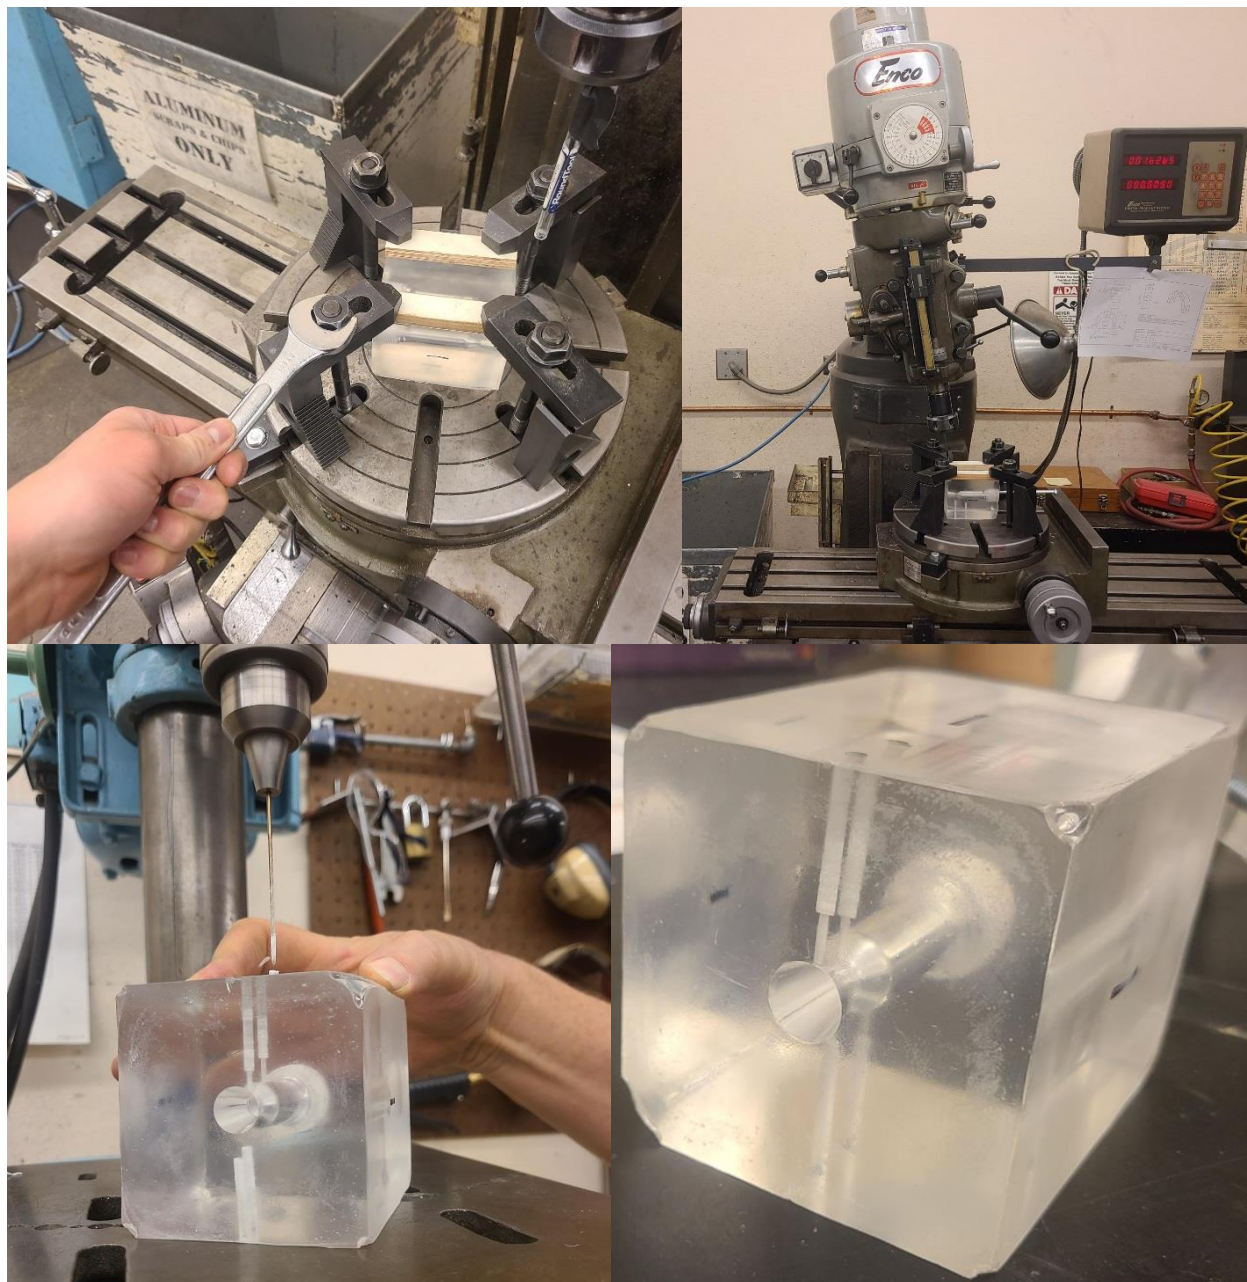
Images, from left to right, of what types of holes were drilled (a), how exactly those holes were placed in the nozzle (b), and how the completed design should look (c).
